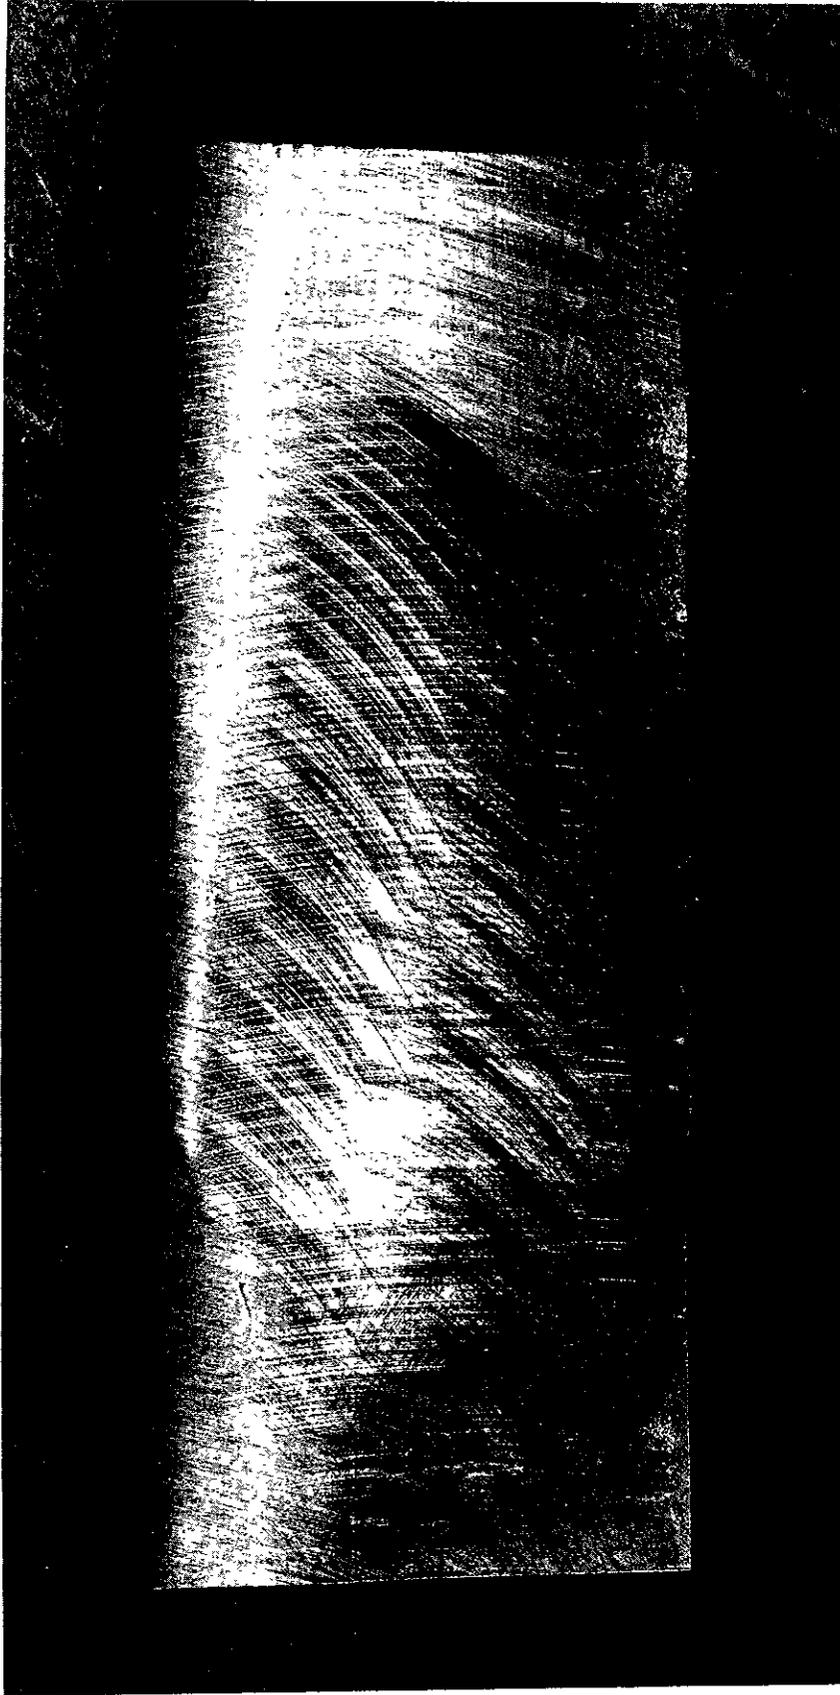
Piece from bottom flange sample viewed from the ground flame-cut edge of the flange from which the sample was taken. No layered inclusion material is visible in this surface to the unaided eye without further polishing or etching. Nevertheless, micro and macro examination of the polished surfaces and ultrasonic of the sample showed that some layered inclusion material was present (see Figures 24 through 27).
